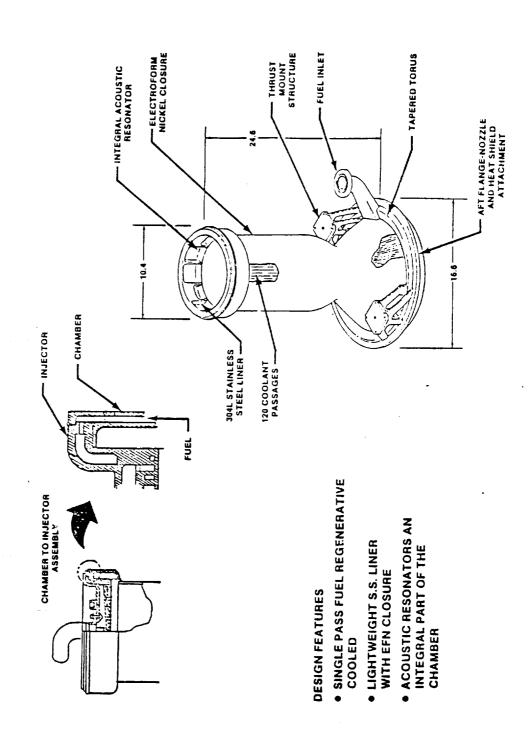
COMBUSTION CHAMBER ASSEMBLY
